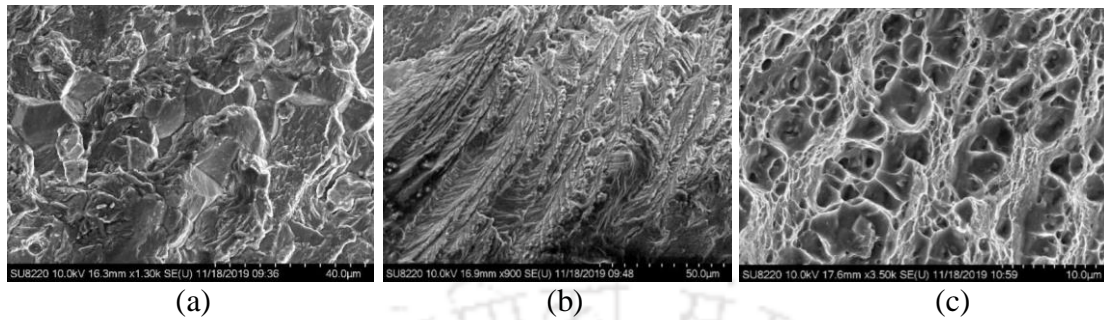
(a). Fracture surfaces at (a) pre-cracking, (b) propagation and (c) final fracture regions at TMAZ
